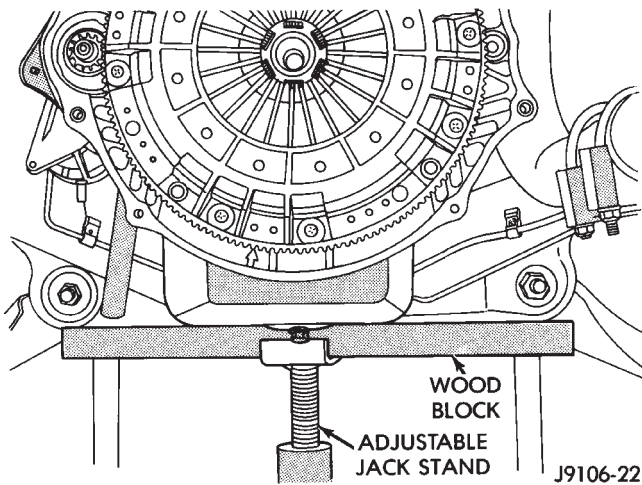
Supporting Engine With Jack Stand And Wood Block—Diesel Model Shown
